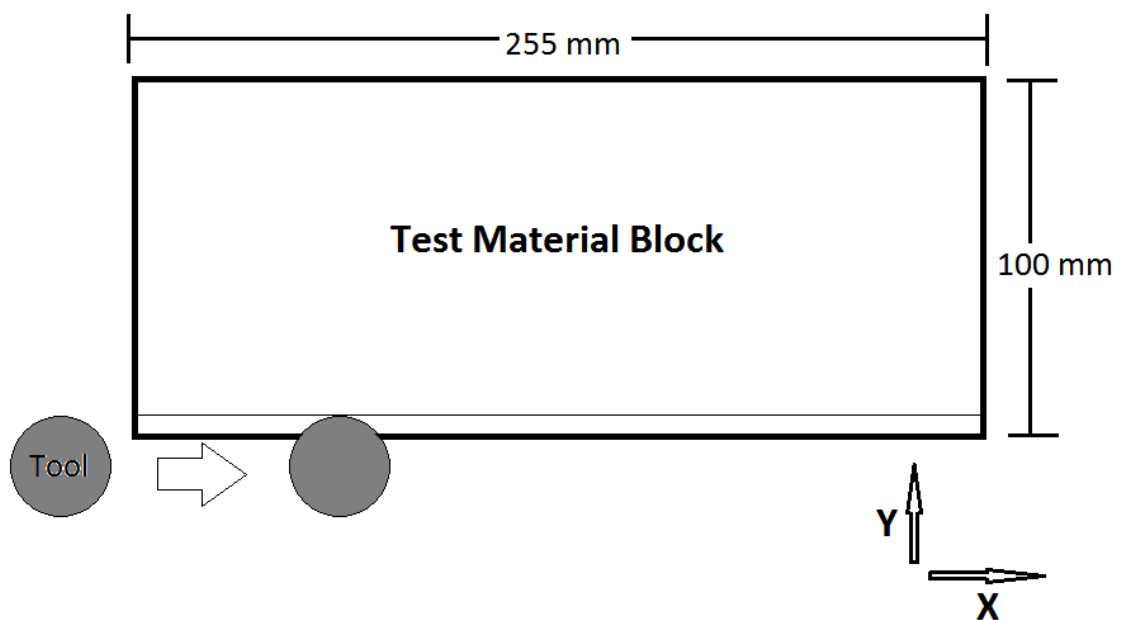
Diagram showing a single cutting pass for testing
